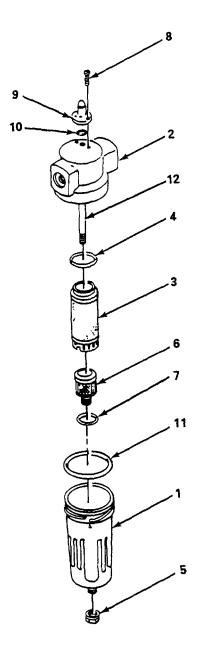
Filter Assemblies, Repair (Coalescing.)
